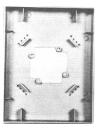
Cover Plate (Rear View): Four pairs for holes marked H and V for drilling through to mount guard.
